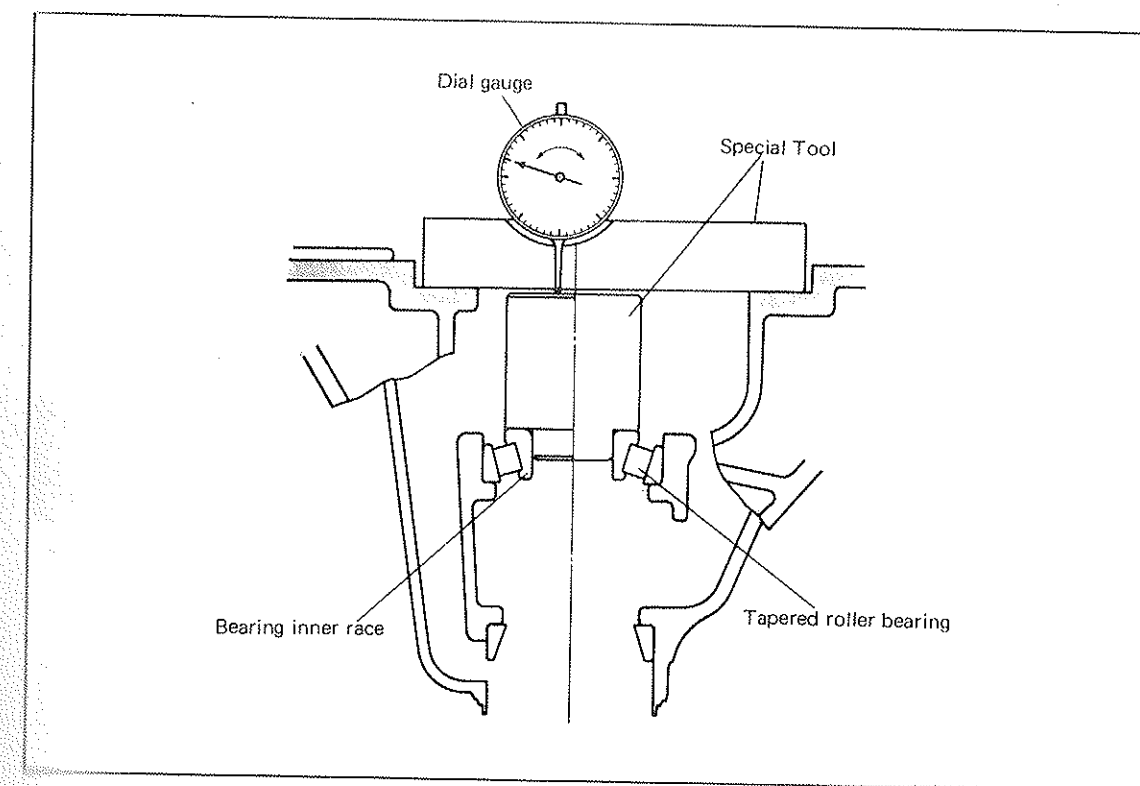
Measuring Amount of Drive Pinion Adjusting Shim
